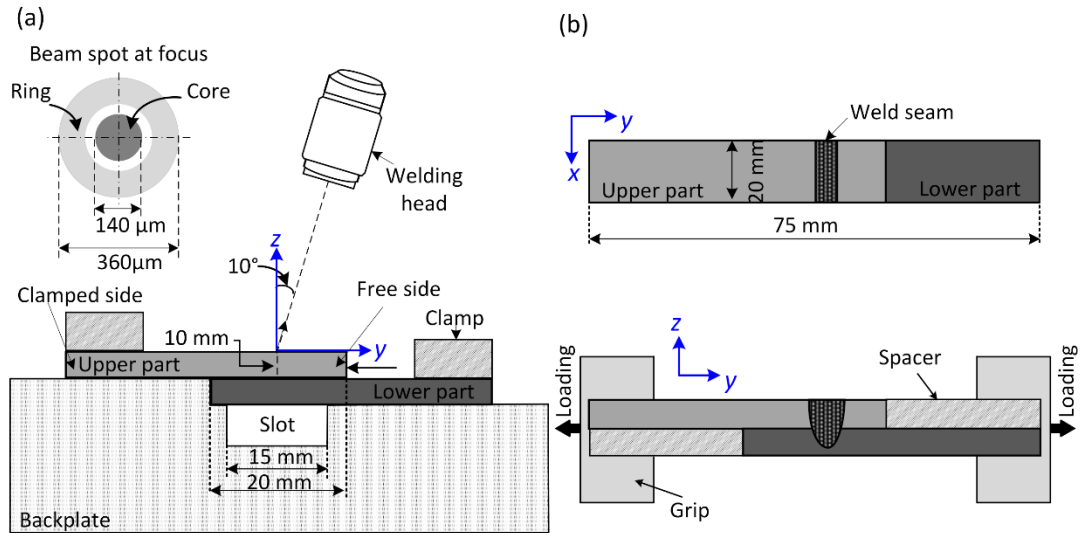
Fig. 1. Schematic diagram showing the experimental setup for (a) welding test with the ARM laser beam and (b) specimen geometry and tensile lap shear tests.
